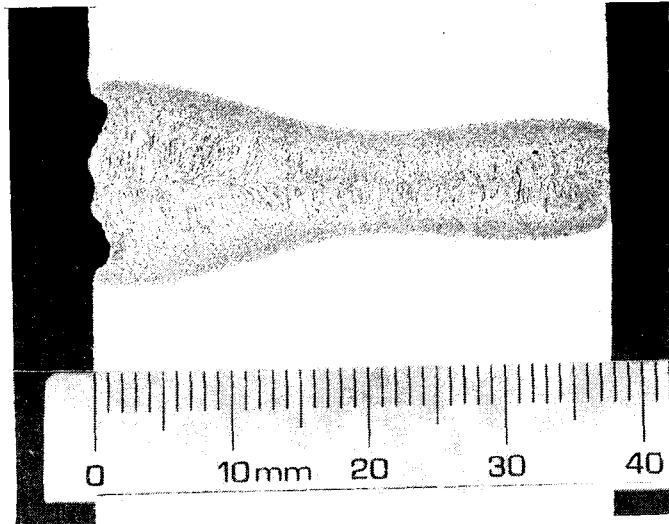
NV Electron Beam weld in 38mm C-Mn Steel produced at atmospheric pressure
